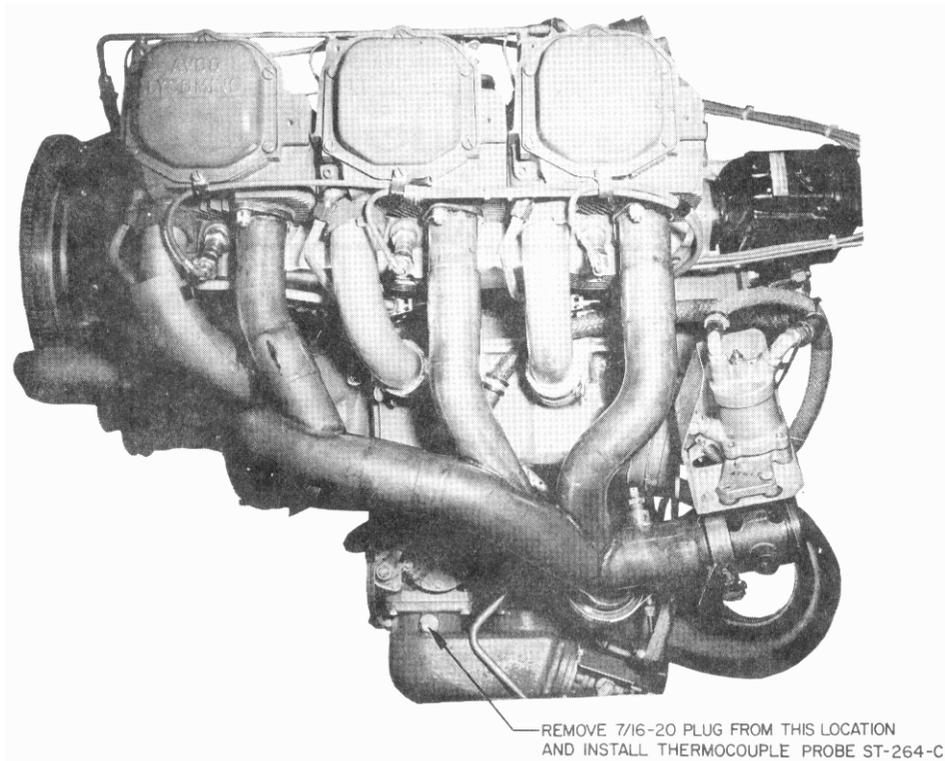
Left Side View - TIO-540-C1A Engine Showing Location of Plug to be Removed
